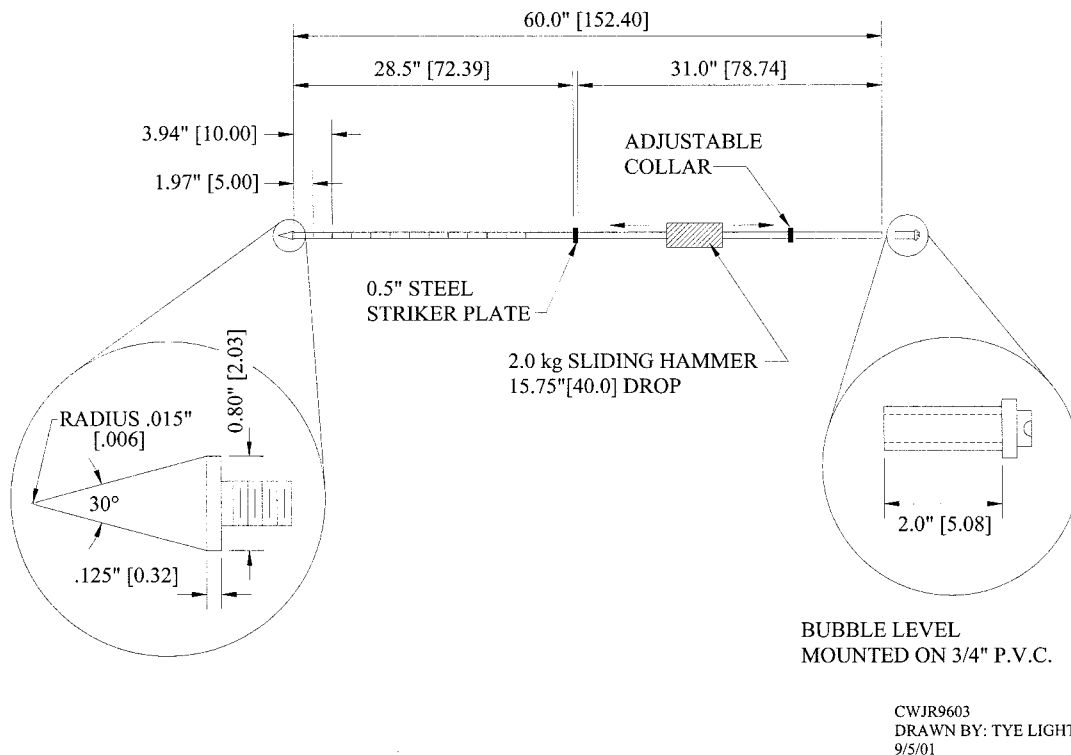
Impact penetrometer design. All dimensions are in inches [cm]. Steel was used for all parts except for the bubble level mount, which is a polyvinyl chloride tube. The striker plate should be welded to the center of a single rod, or to the bottom half of a two-piece rod. The top half is then threaded. Cone is cut from steel on a lathe, then hardened. Penetrometer can be shortened for transport by threading bottom end of top section of shaft into striker plate.
